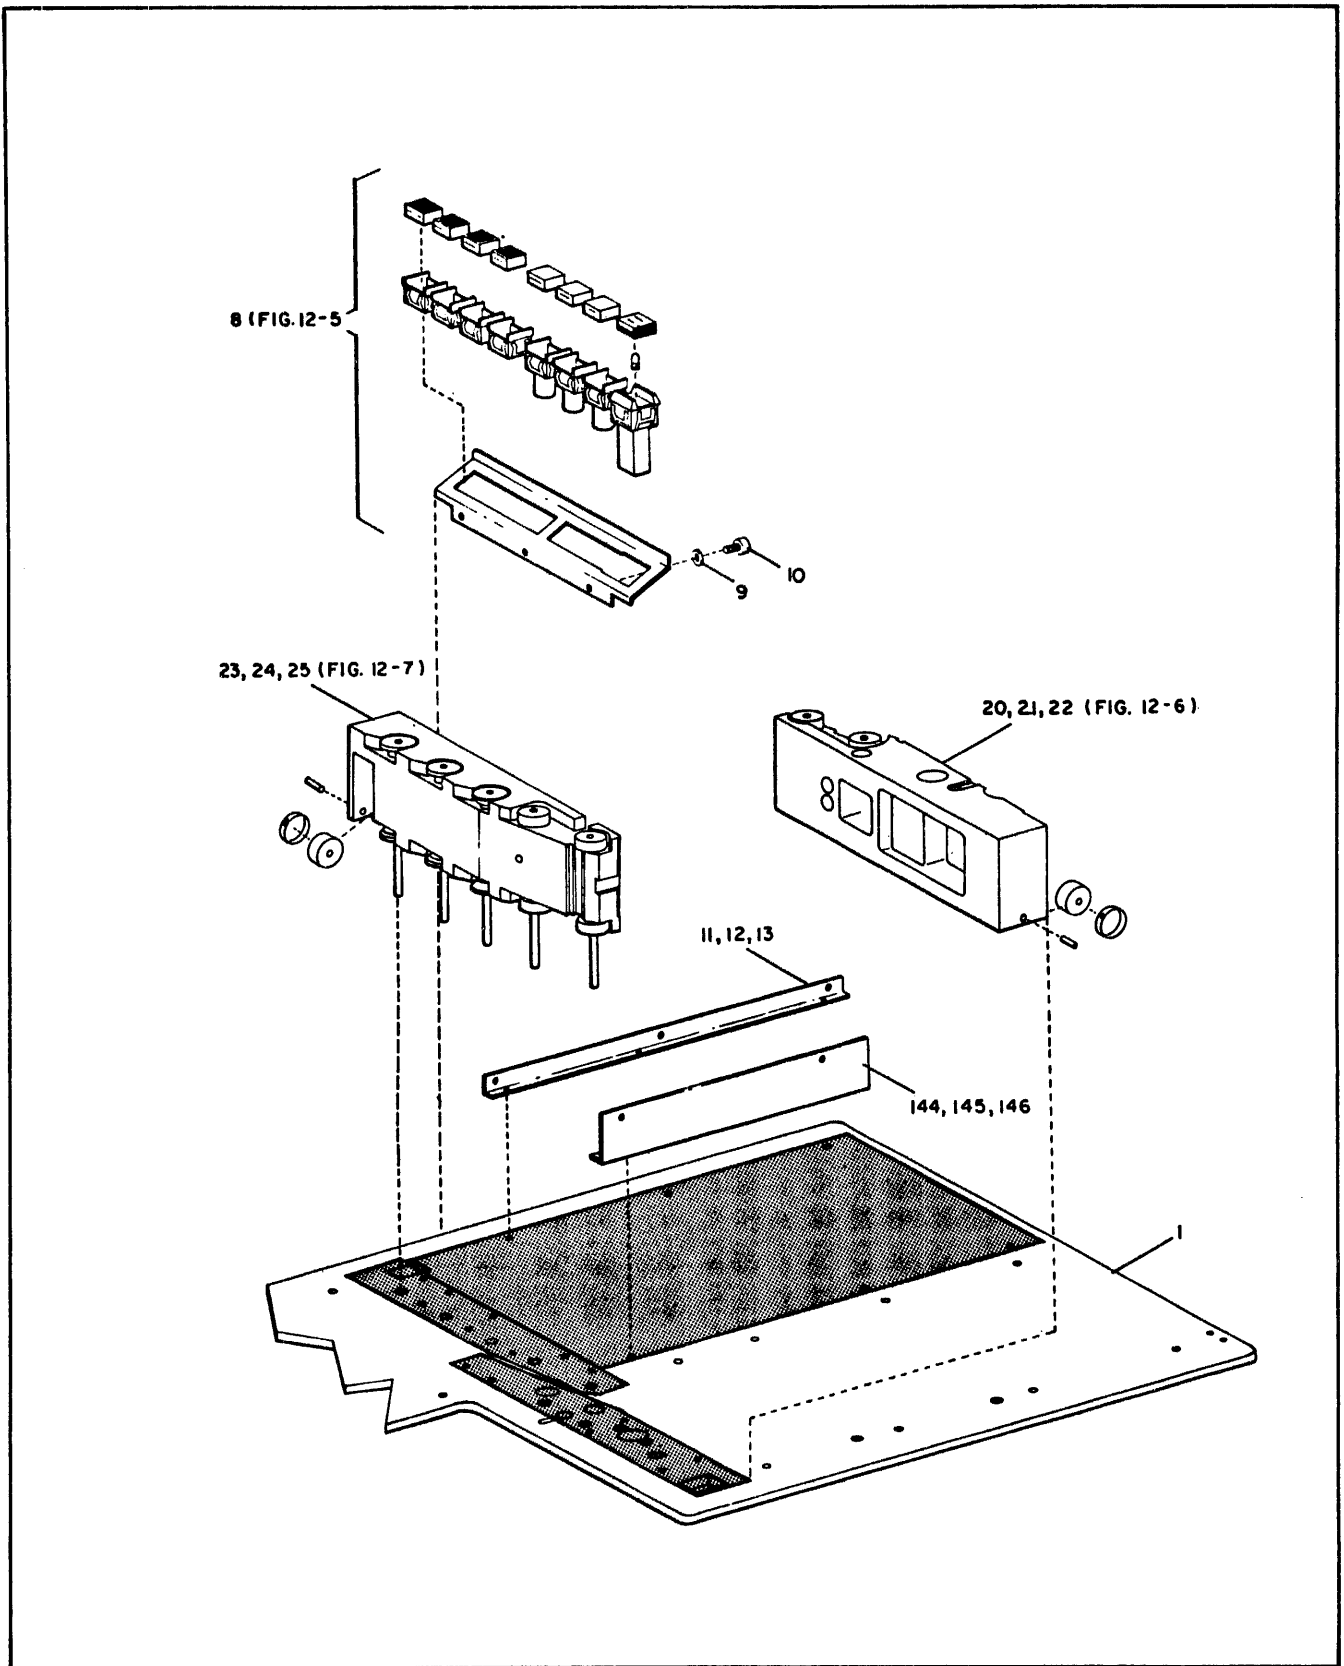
TOP PLATE ASSEMBLY (sheet 2 of 4)
